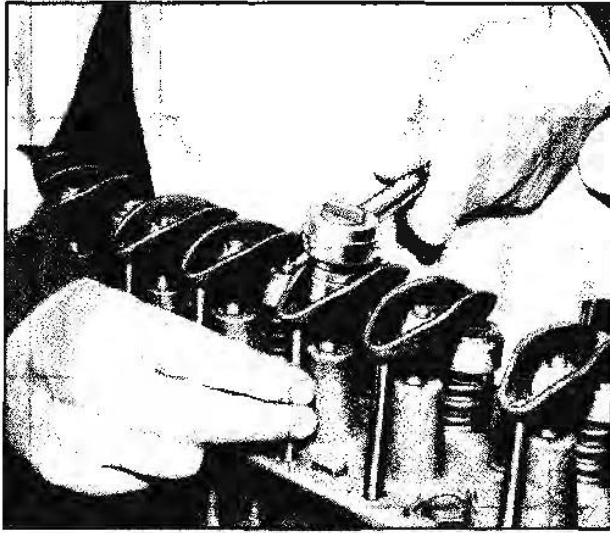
Adjusting Valve Lifter Plunger Travel
